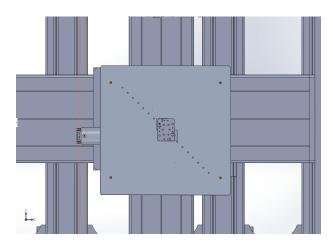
(Color online) Inclined top view of the needle placement machine.
